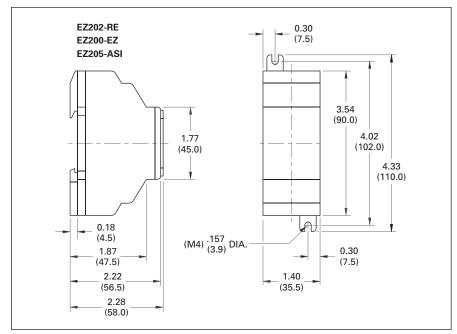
EZ202-RE/EZ200-EZ/EZ205-ASI Series Dimensions in Inches (mm), Drawing Number MD05013012E
